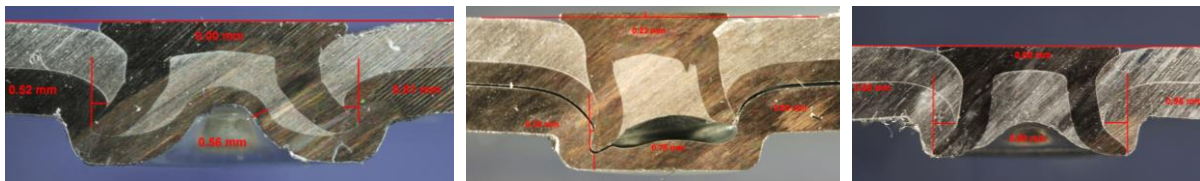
, (left) Buckled rivet, (centre) Collapsed rivet, (right) Rivet too long.
